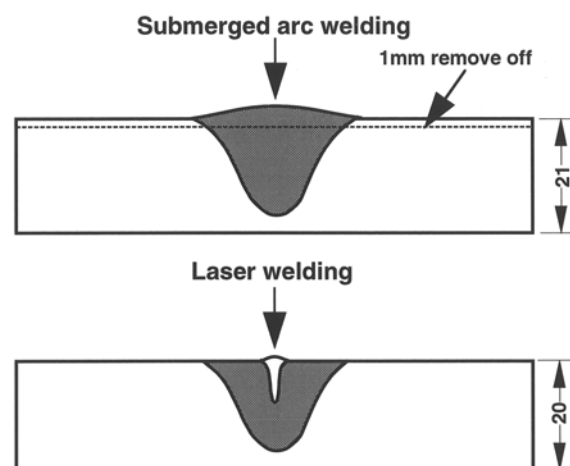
Laser welding method on the submerged arc weld metal.
